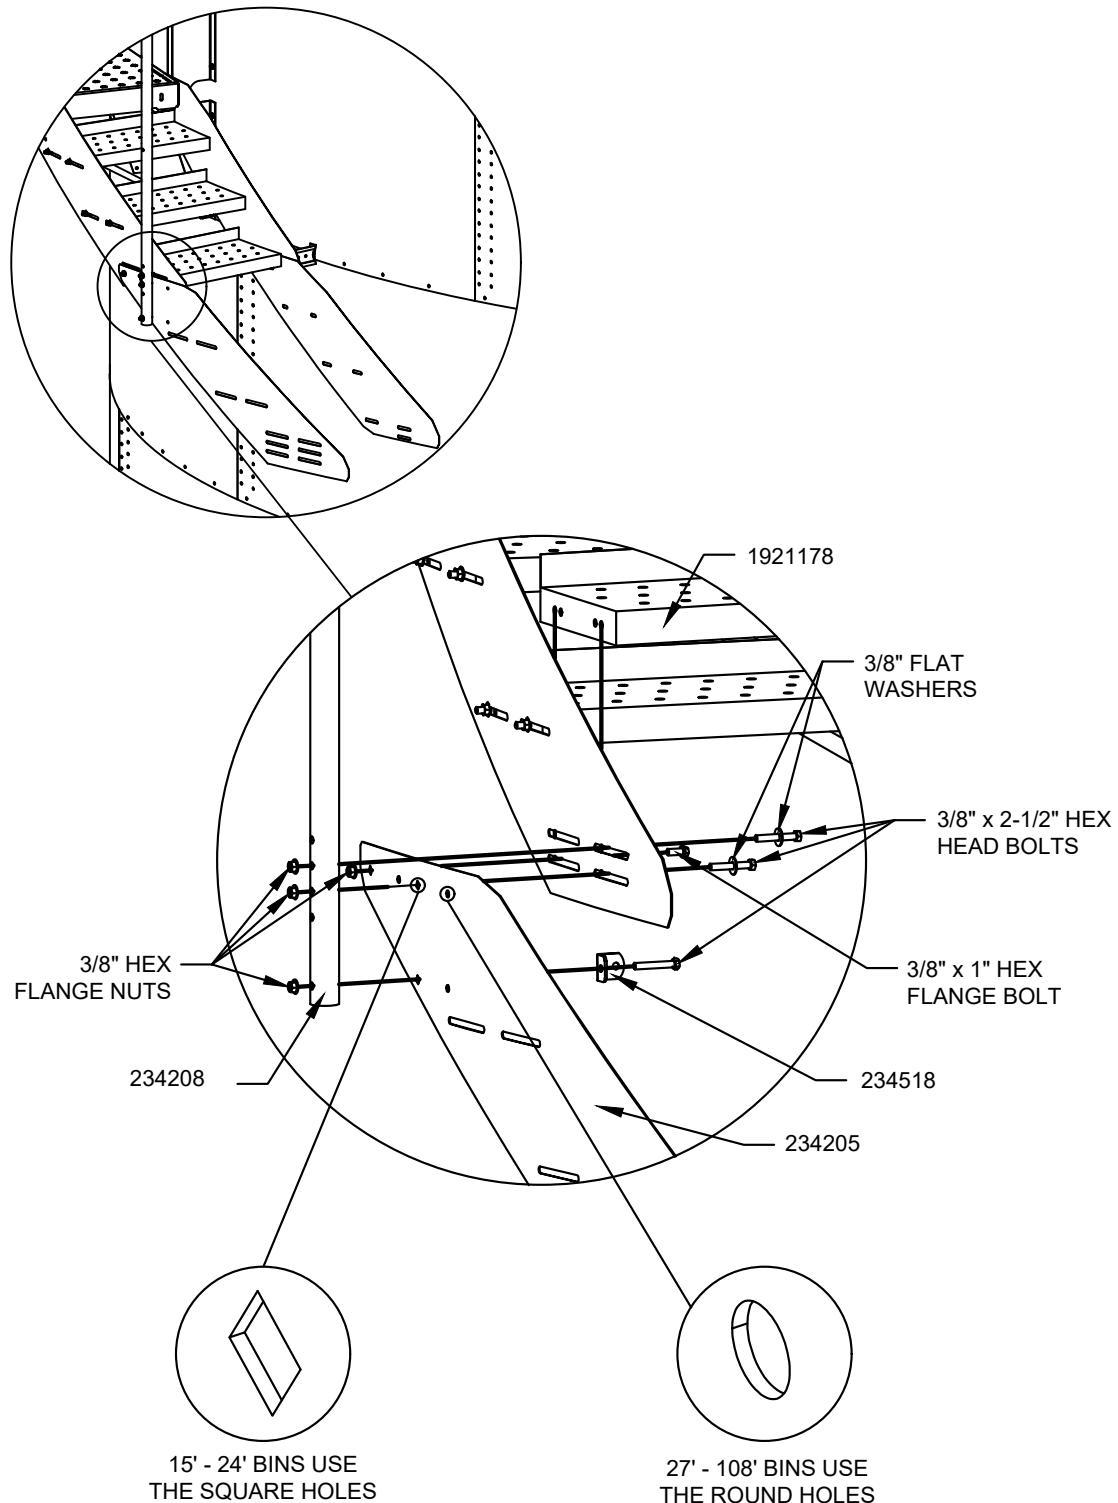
Inner Stringer and Tread Installation at Horizontal Seam
